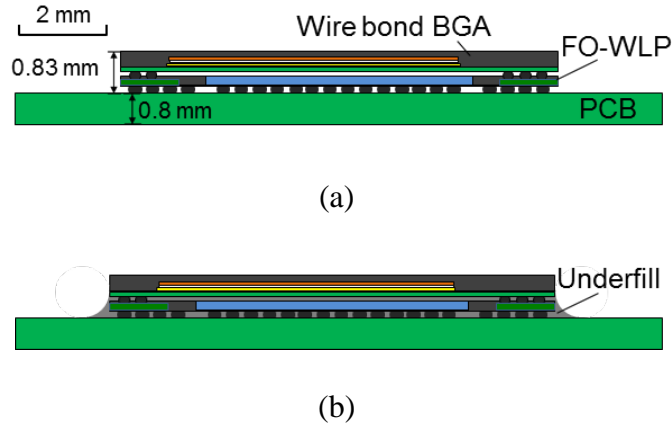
Cross sections of the PoP specimens: (a) without underfill and (b) with underfill
